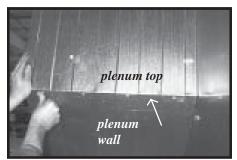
Outside dryer - pressing bottom edge of plenum top to plenum wall.
